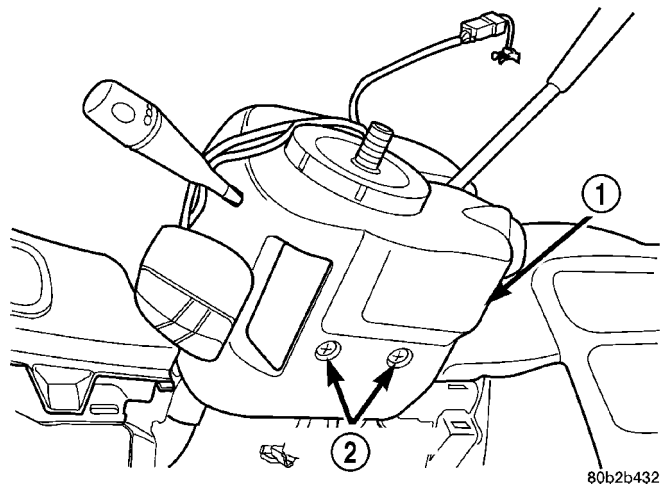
LOWER SHROUD ATTACHING SCREWS
